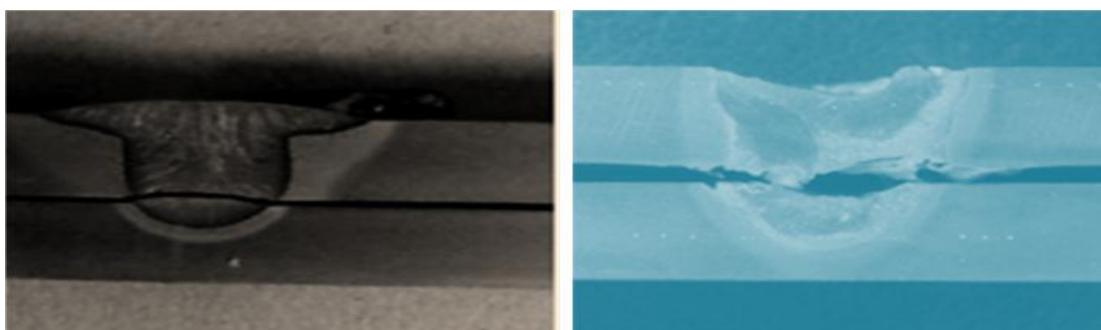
Macro-photograph for welds D1 (left) and W1 (right) conducted by Welder C [11].
